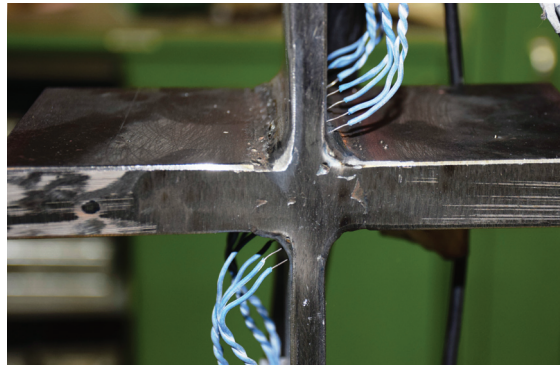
Detail of weld toe end on plate edge
